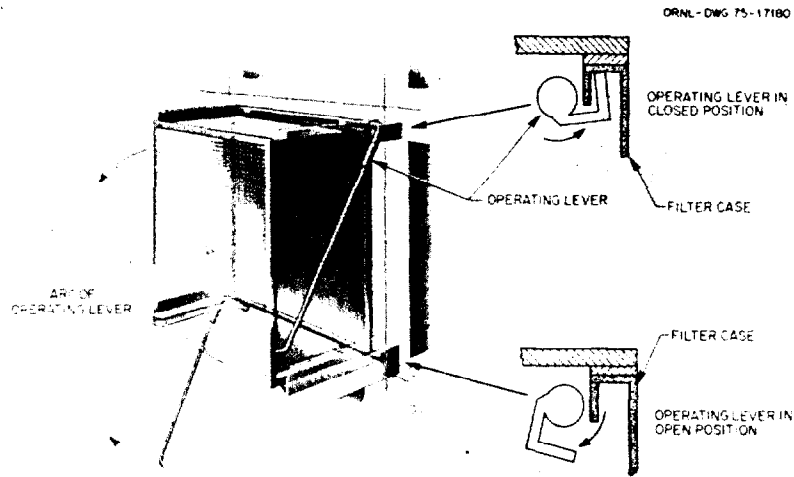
Torsion bar clamping system. Details show end views of operating lever in closed and open positions. Note that clamping is on gasket flange of filter, and that clamping pressure is applied to only two sides of the filter. The operating levers are slightly bent when locked, which provides the spring pressure needed to compress the gasket. This method can be used only with steel-cased filters. It eliminates tools and loose items in the filter housing during a filter change and is easy and fast to operate. Courtesy American Air Filter Co.
